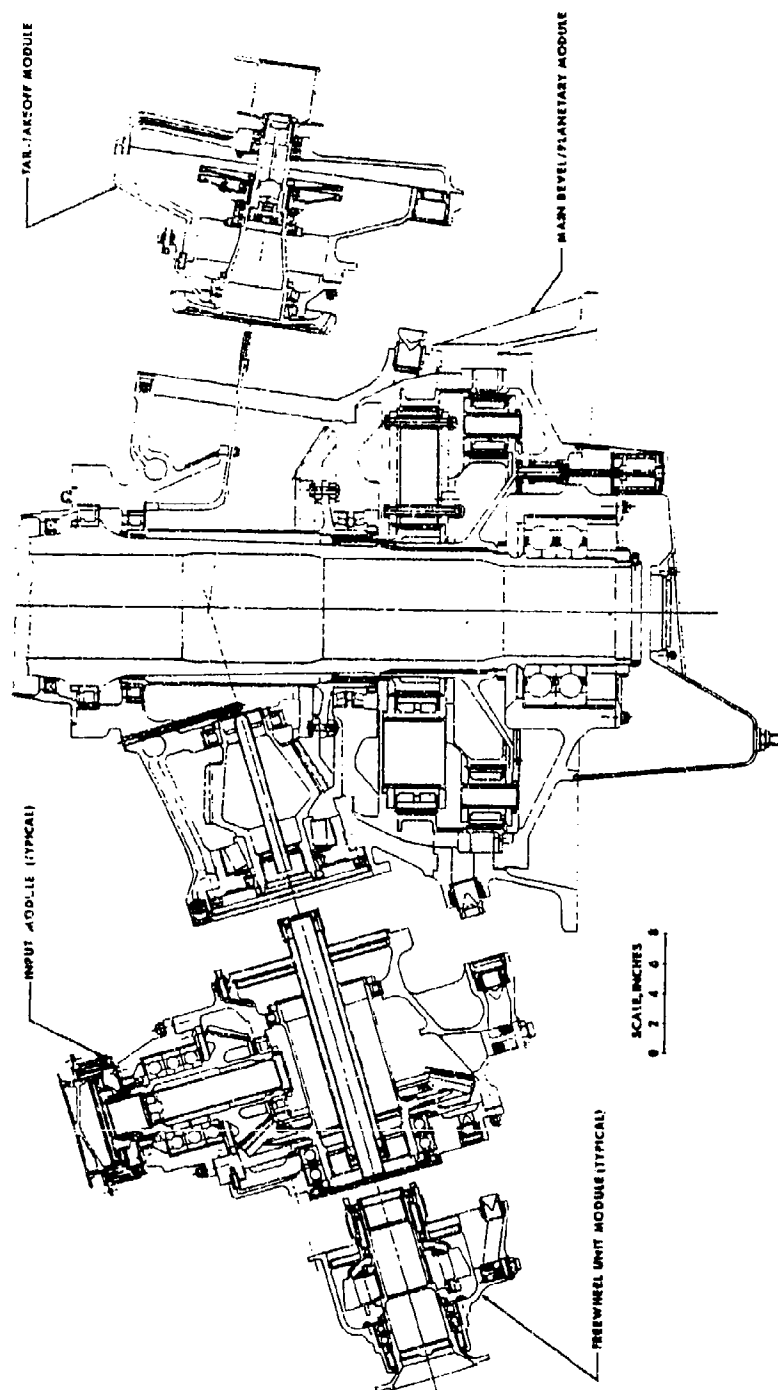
CH-54 MODULARIZED GEARBOX CROSS SECTION
